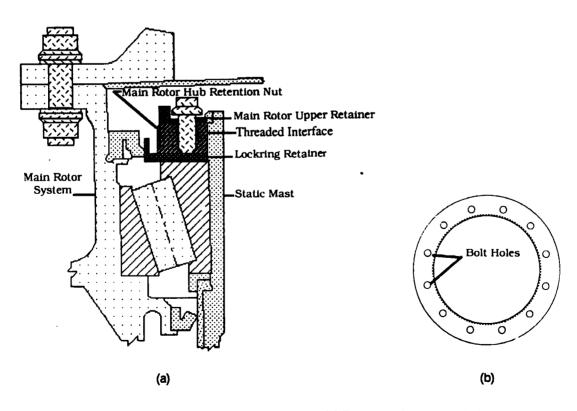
(a) Cross-sectional view of main rotor system, (b) Top view of main rotor hub retention nut with 12 bolt holes shown. Central hole is threaded to fit onto the threaded external diameter of the static mast.
